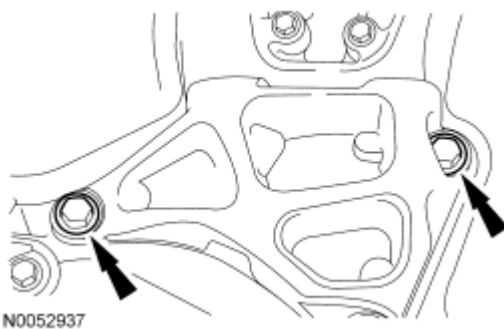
Locating Upper Engine Mount Bracket Bolts
